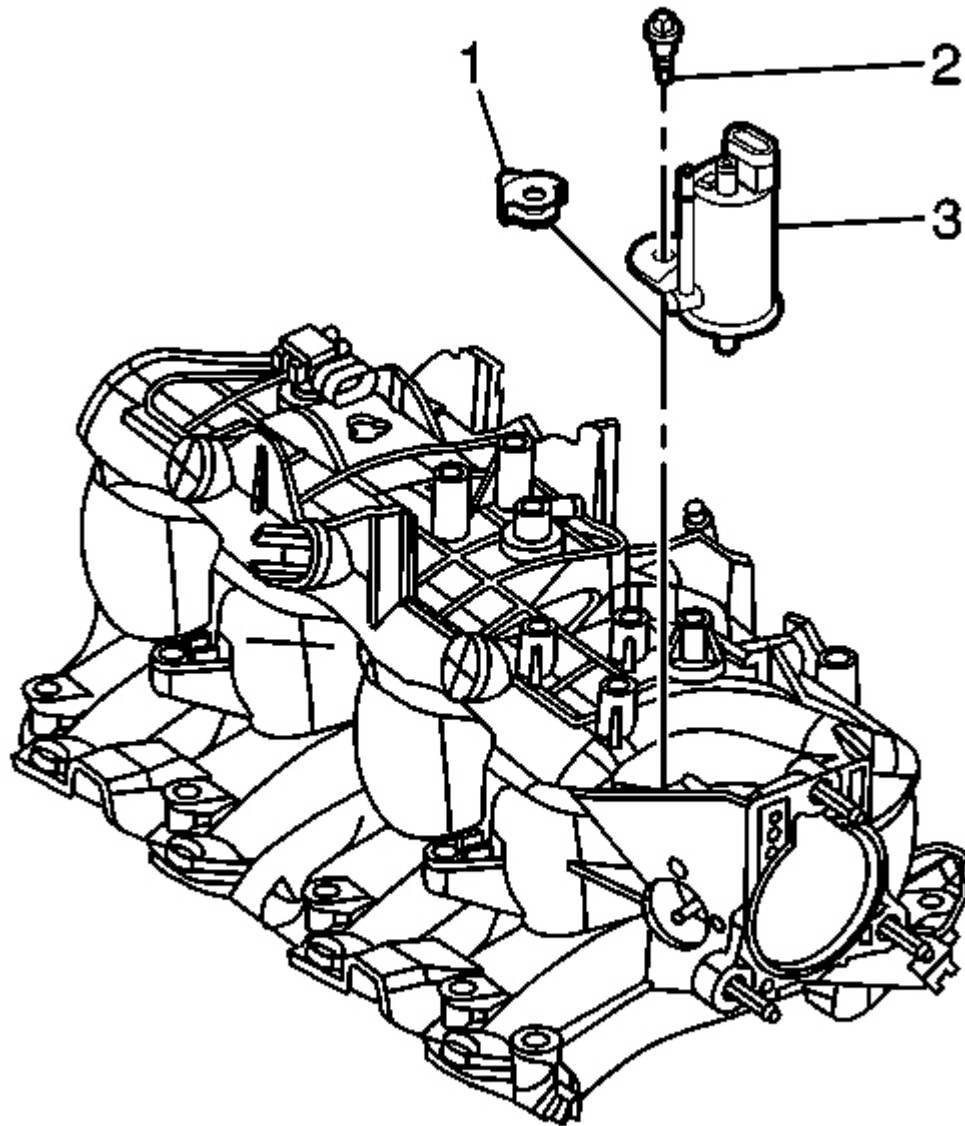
View Of EVAP Purge Solenoid Bolt, Solenoid & Isolator
